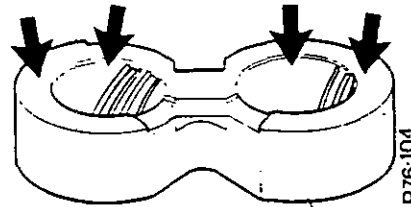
INSPECTION OF THE PUMP BEARINGS
